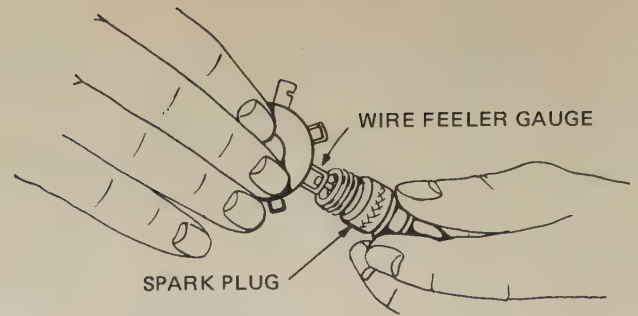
Using a wire feeler gauge to check spark-plug gap. (Briggs & Stratton Corporation)
